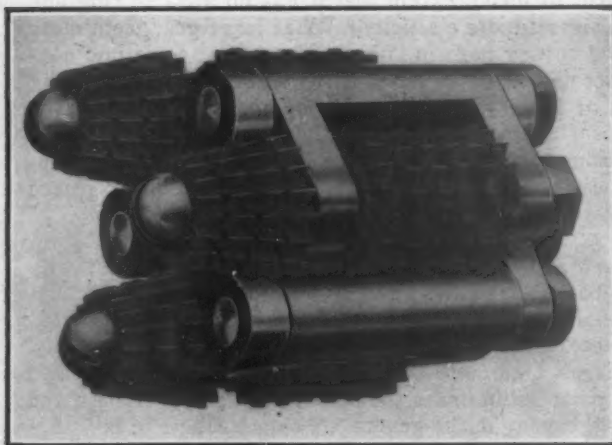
A New Boiler Tube Cleaner Head Made by the Roto Company, Hartford, Conn.
